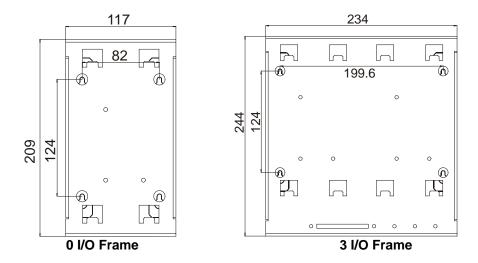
No I/O and 3 I/O Frame Installation Dimensions and Screw Holes for Installation
